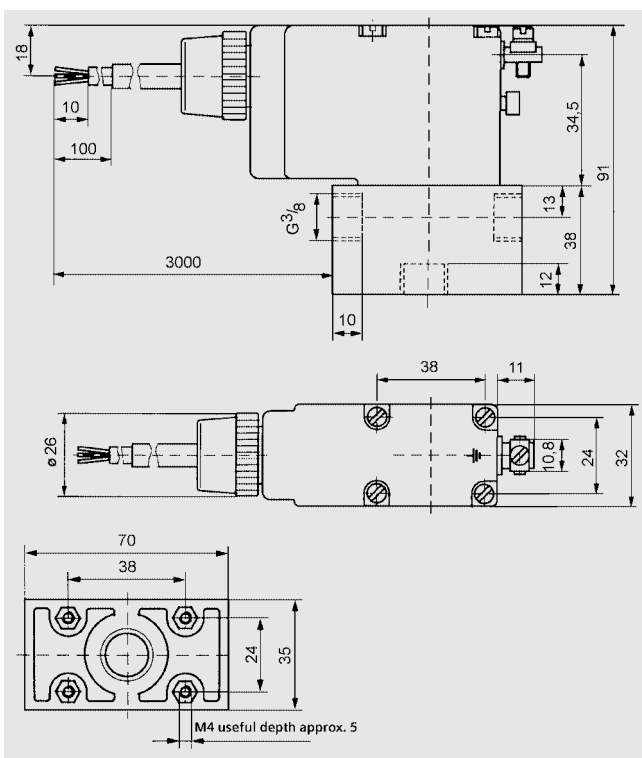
/24 2/2-way solenoid valve made of PVDF, explosion-proof
